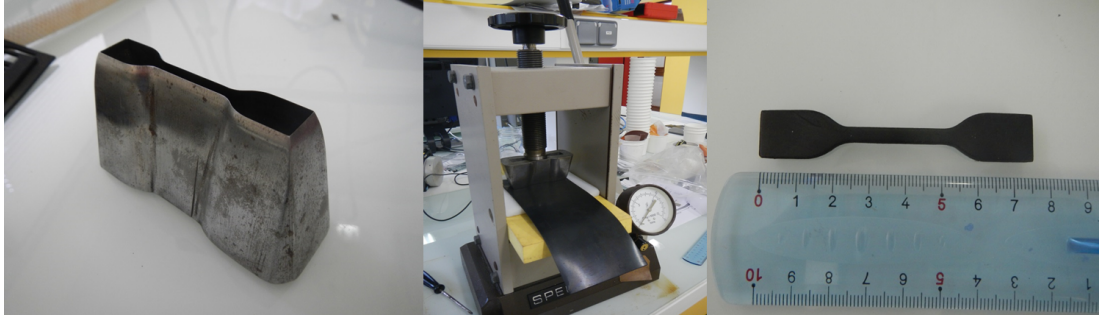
Sample preparation for ISO37 standard from left to right: die for cutting samples; press in use with die and 2mm EPDM 70ShA; final specimen example.
